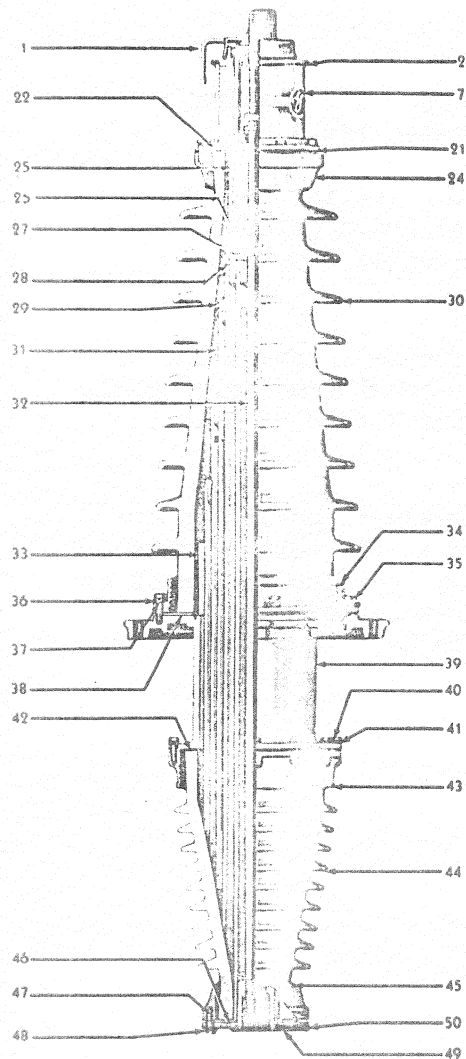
Sectional view, showing construction which is typical of all Type OF bushings
